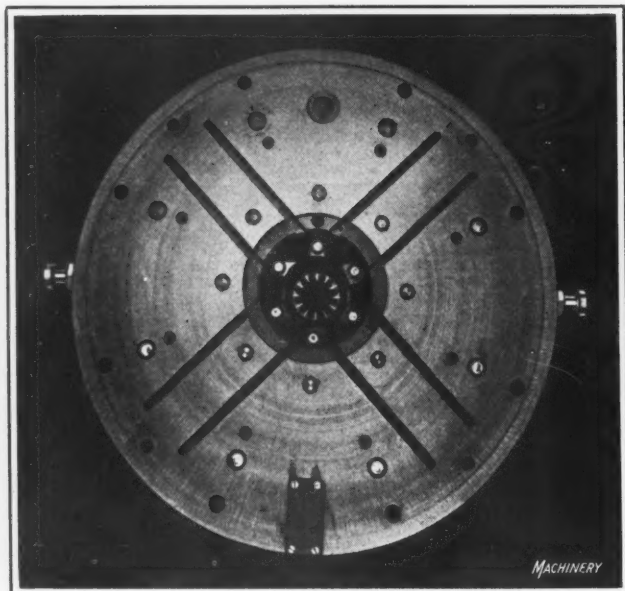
Top of Tool-head as it appears when mounted on the Machine
